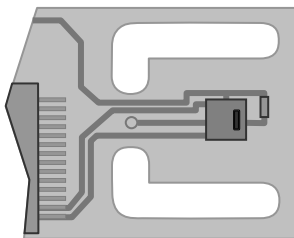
Top view of example of mounted SHT2x with slits milled into PCB to minimize heat transfer.
